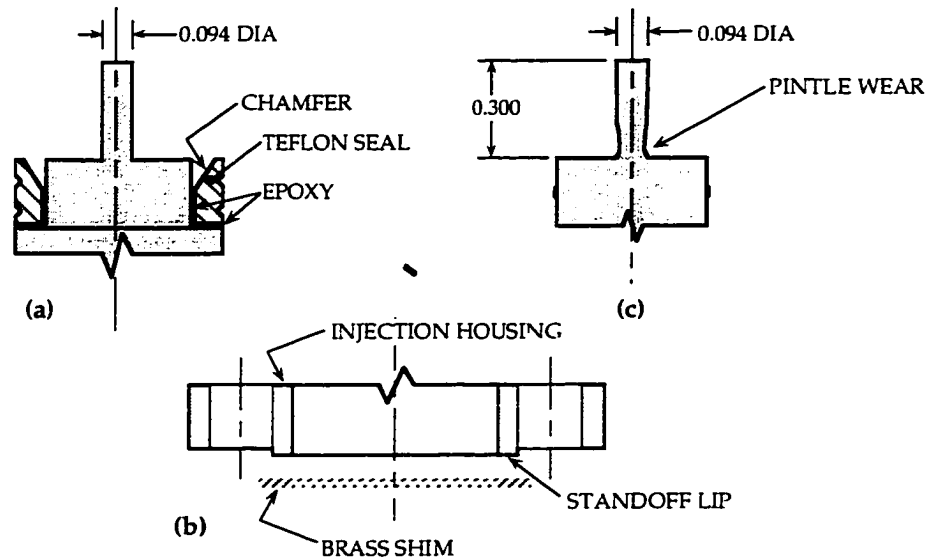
Special issues concerning particle injector. (a) Sketch showing epoxy adhesive and chamfer on inner edge of plunger base seal. (b) The standoff lip on bottom sealing surface of injector housing and brass shim provide superior sealing there. (c) Schematic showing typical mode of wearing on the injector pintle. The taper is exaggerated for clarity; it is usually difficult to detect because of its proximity to base.
